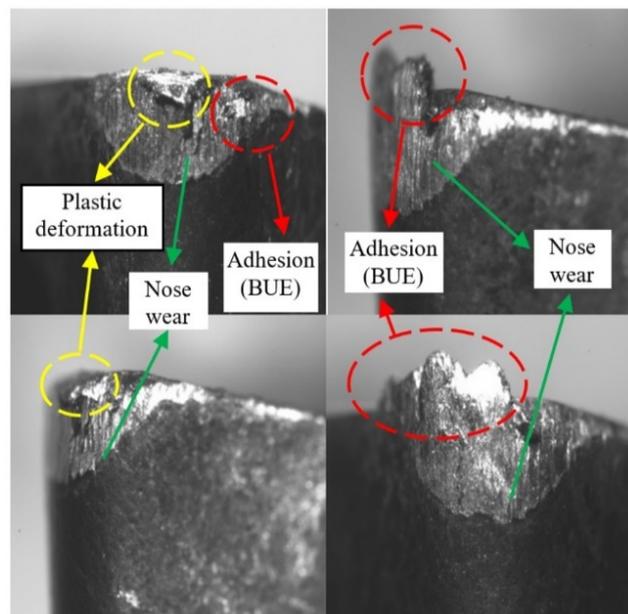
Tool wear images at 160 m/min cutting speed and 0.2 mm/tooth feed; a) Dry cutting, b) MCA
